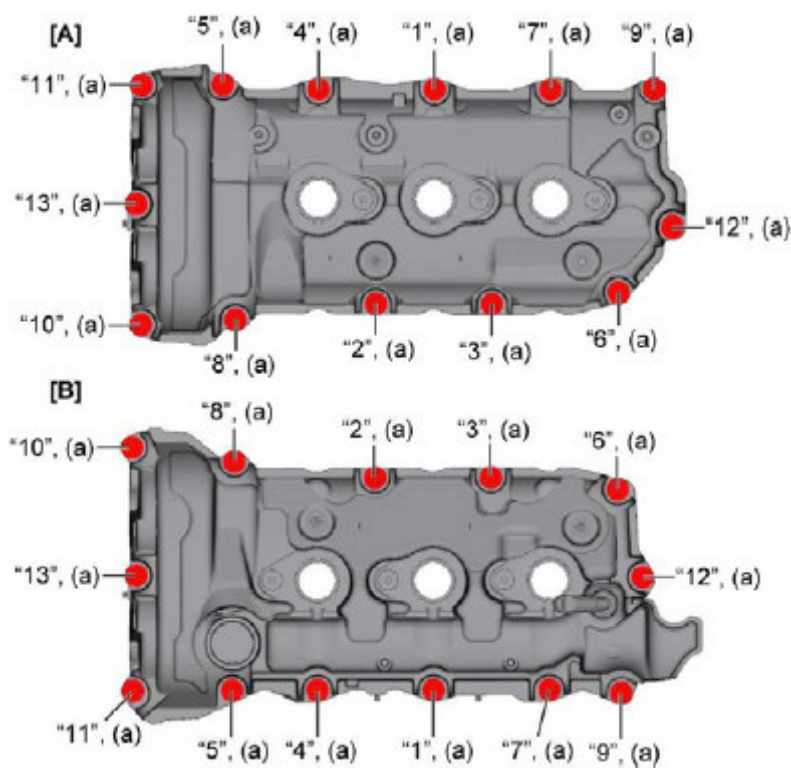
Identifying Cylinder Head Cover Gasket
